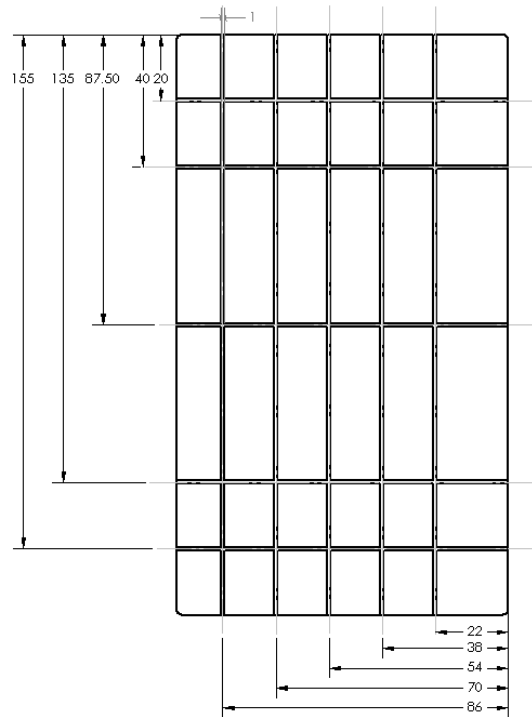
Groove geometry on surface of oscillating heat pipe for placement of thermocouples.
